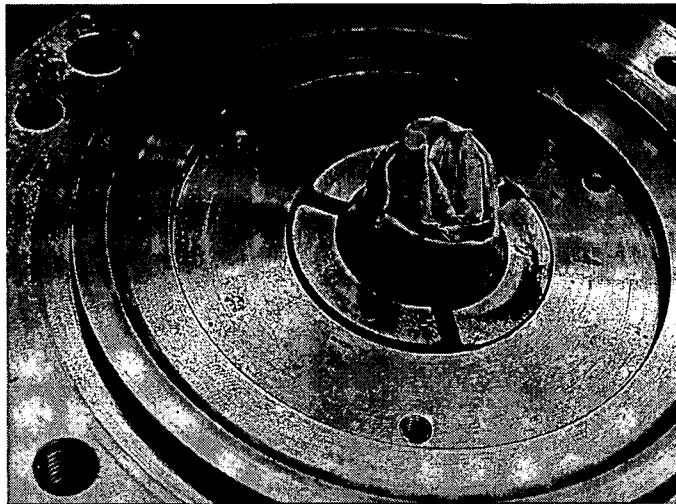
Observed lubricant on the back flange near the fixation holes for the disk of the radial bearing. Graphite powder coming from abrasion of the gas bearings can be seen as well.
